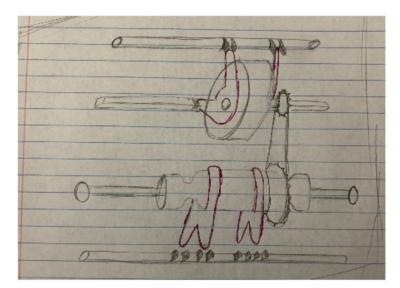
Concept sketch for full powertrain assembly including new mount design.
